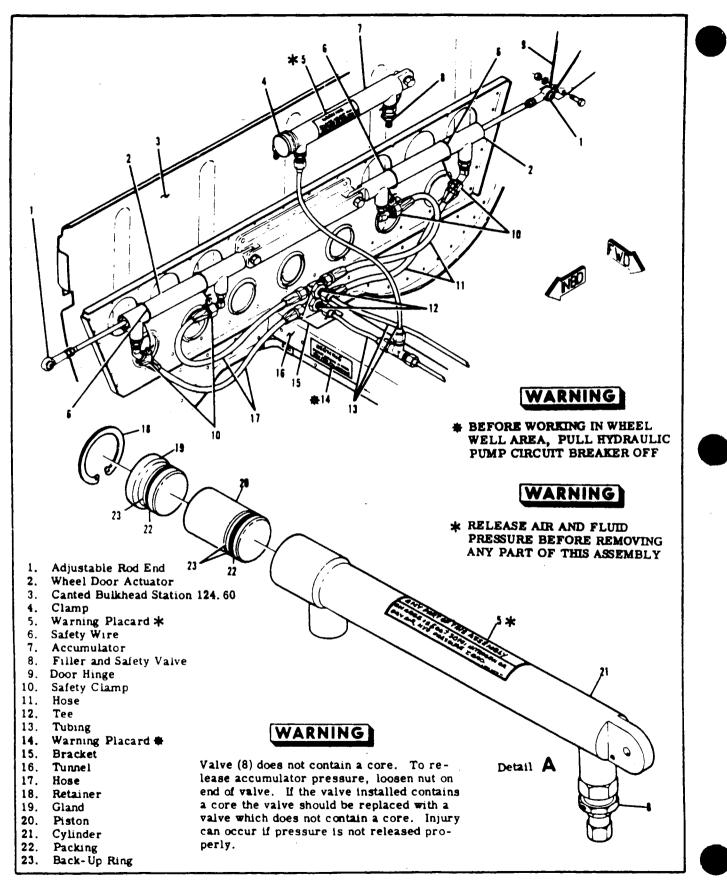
Main Landing Gear Wheel Door Close System Accumulator
